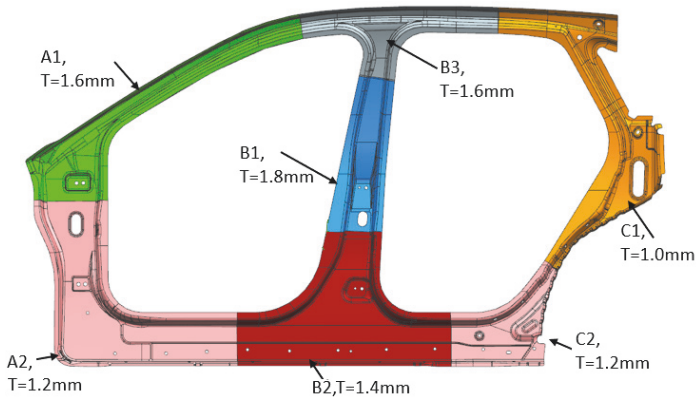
Structure of the double door ring of the body and the plate thickness arrangement of the welded plate
